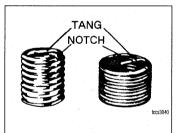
Standard thread repair insert (left). and spark plug thread insert
